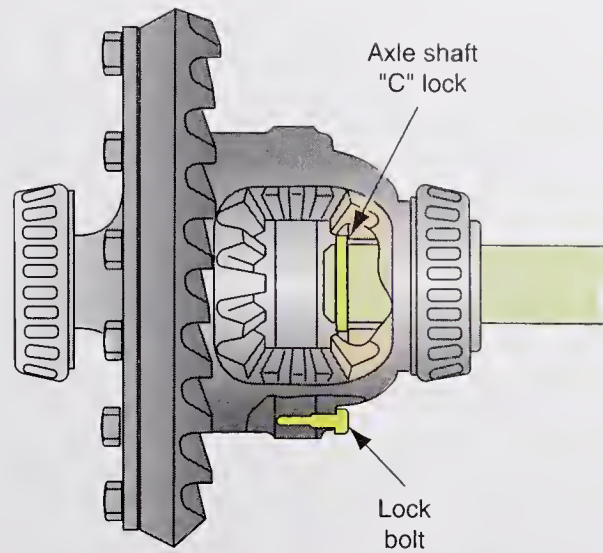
Rear axle "C" lock, lock bolt, and pinion gears.
